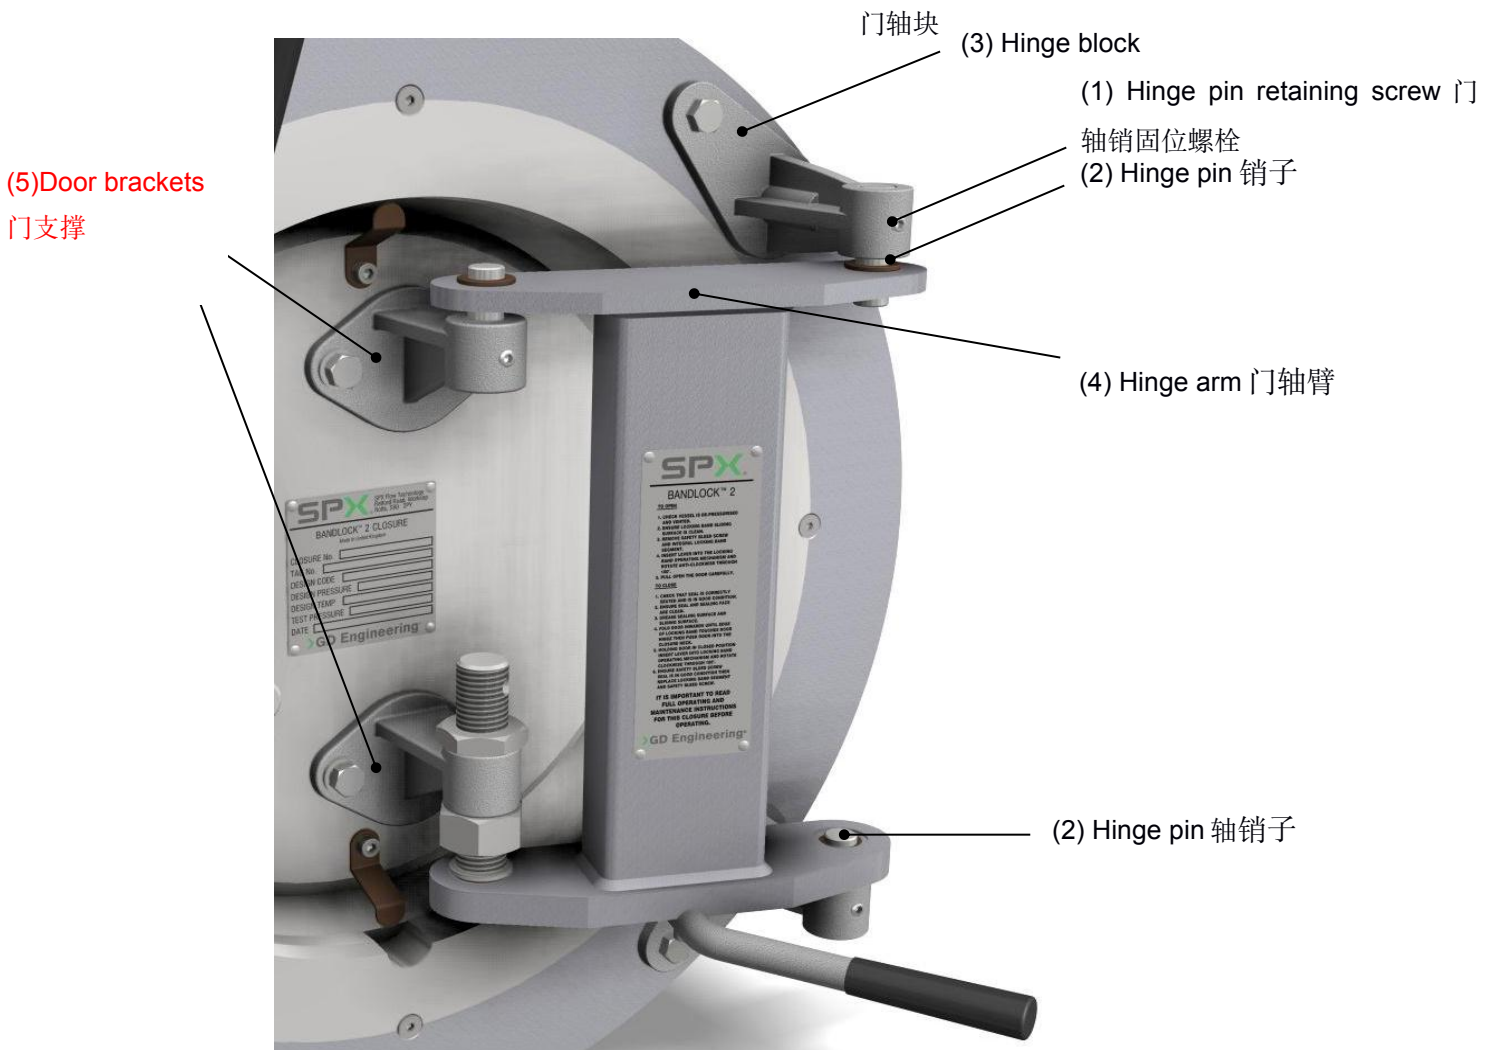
Closure Door Removal / Re-installation (门拆除及重安装)
